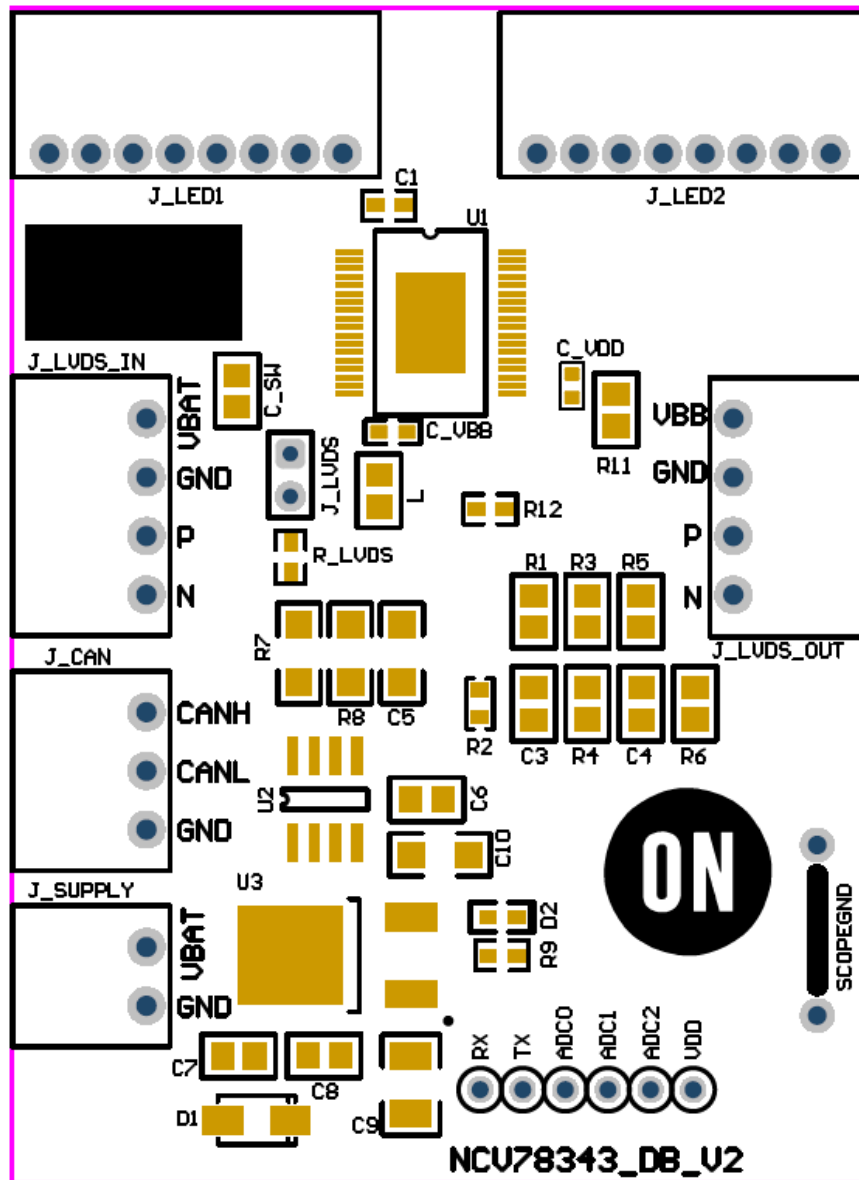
NCV78343R1DAGEVB Satellite Board Assembly Drawing
